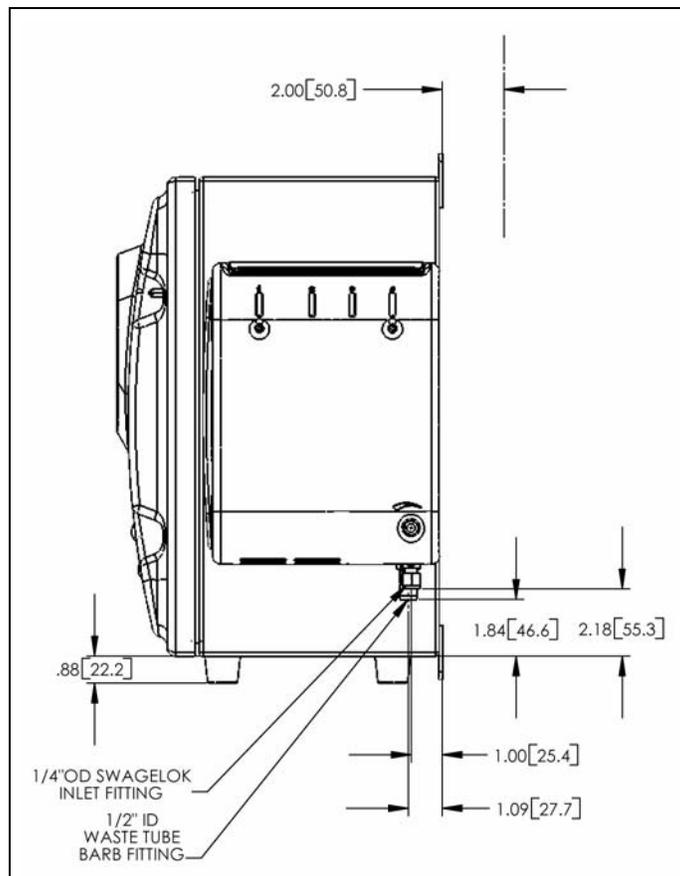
Right-Side Analyzer Dimensions, with Super iOS System
